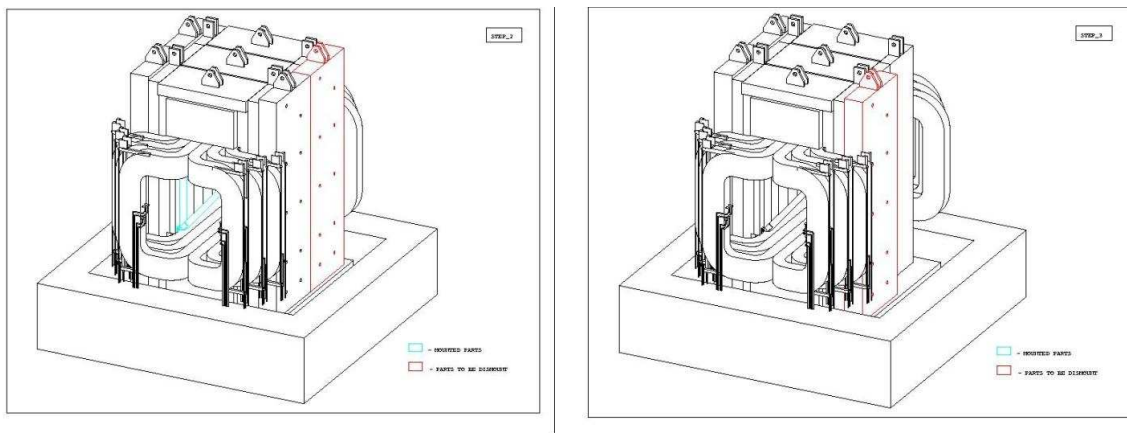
SM3 Analysis Magnet Assembly Steps 3 (left) and 4 (right)
